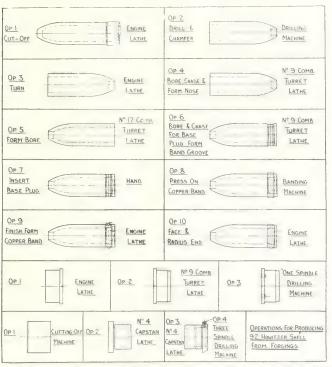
SHOWING SEQUENCE OF MACHINING OPERATIONS ON 92 IN, MARK II. L. HIGH EXPLOSIVE HOWITZER SHELL RODIES, BASES AND NOSE BUSHES.
